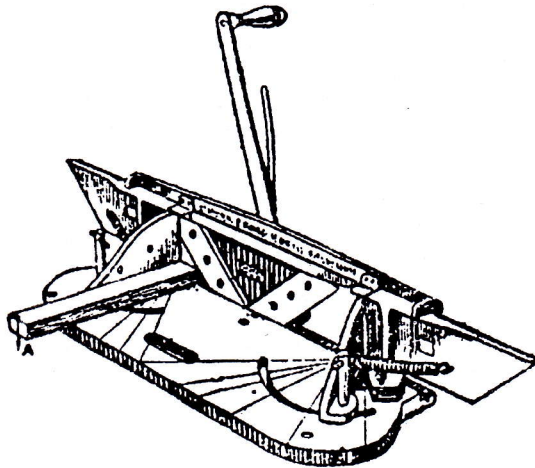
THE WOOD TRIMMER, SHOWING HOW END OF RAIL IS TRIMMED PRIOR TO DOWELLING.
